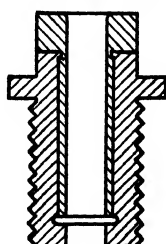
Screw bushing with a slip sleeve or bushing inside.
